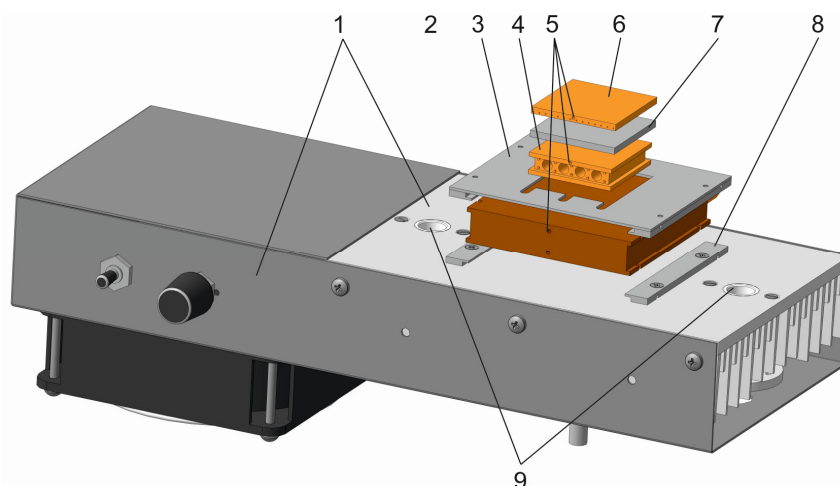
Structure of the heat removal unit: 1 – ribbed radiator with blower fan; 2 – water heat exchanger; 3 – centering plate for the thermometer; 4 – thermometer; 5 – holes for installing thermocouples; 6 – corrective heater, 7 – thermal shunt; 8 – fastening unit for replaceable heat exchangers. 9 – sliding bearings of the unit for moving the heat exchange units.
